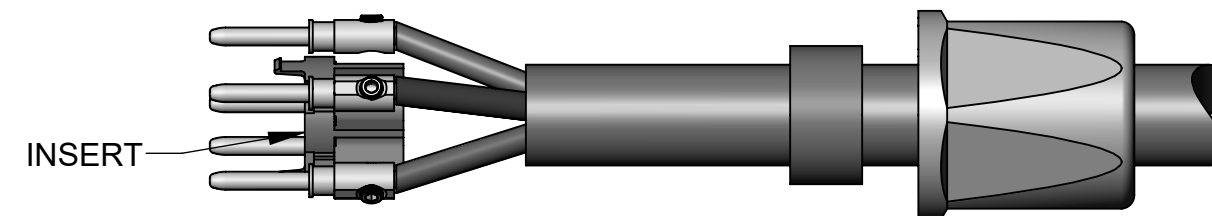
FIG A: INSERT (CONTACT CARRIER) REAR VIEW
